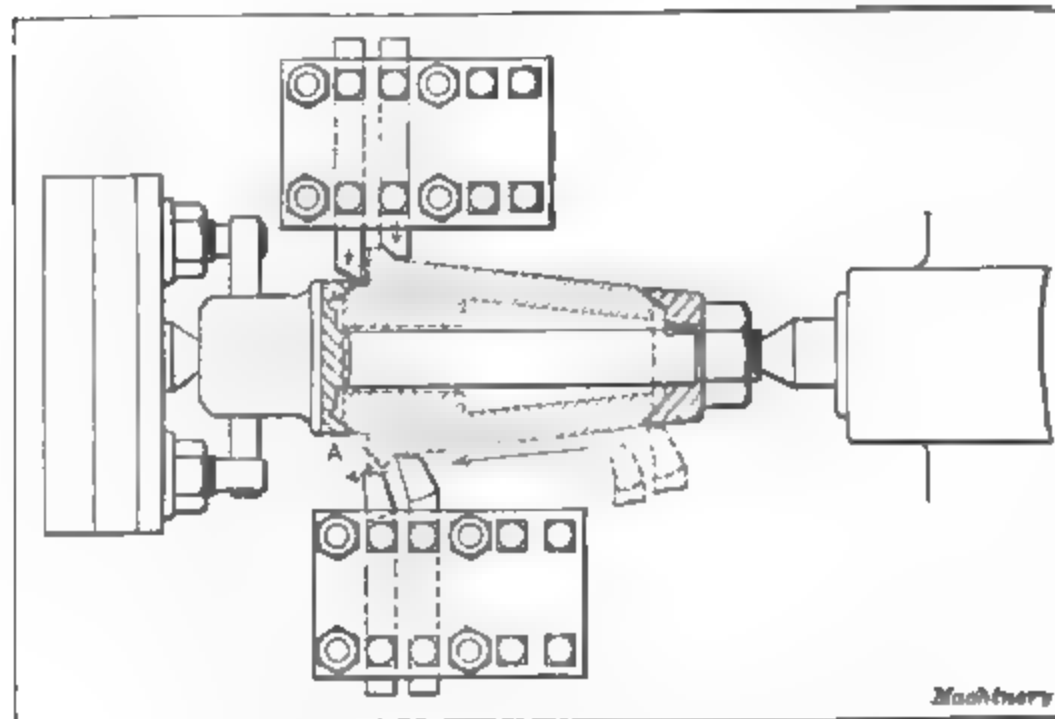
Method of holding Tapered Bushings shown in Fig. 7
